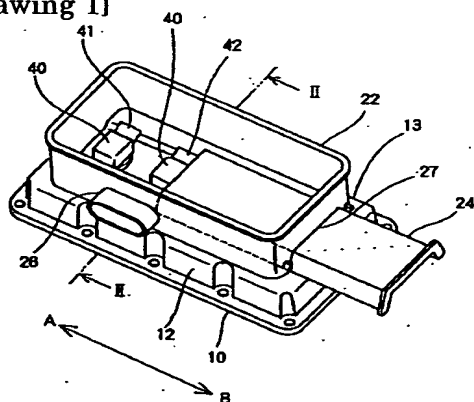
It is drawing showing the suction system module by one example of this invention, and is the typical perspective view showing the united cylinder-head cover and the bottom case of an air cleaner.
